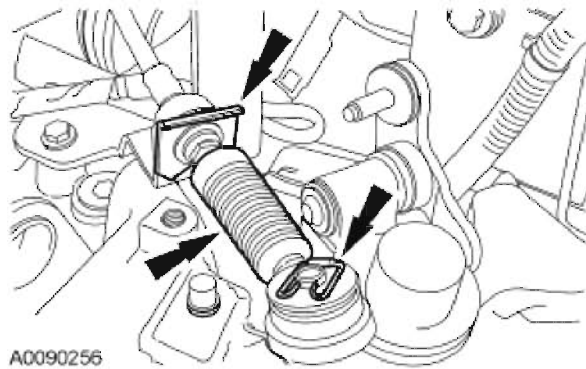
Locating Clutch Hydraulic Tube Fitting
